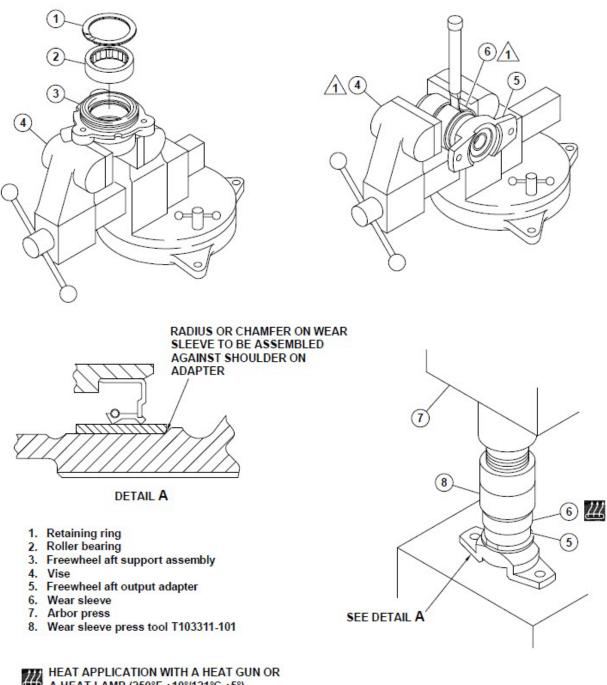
Freewheel Aft Support Assembly (sheet 2 of 2)
